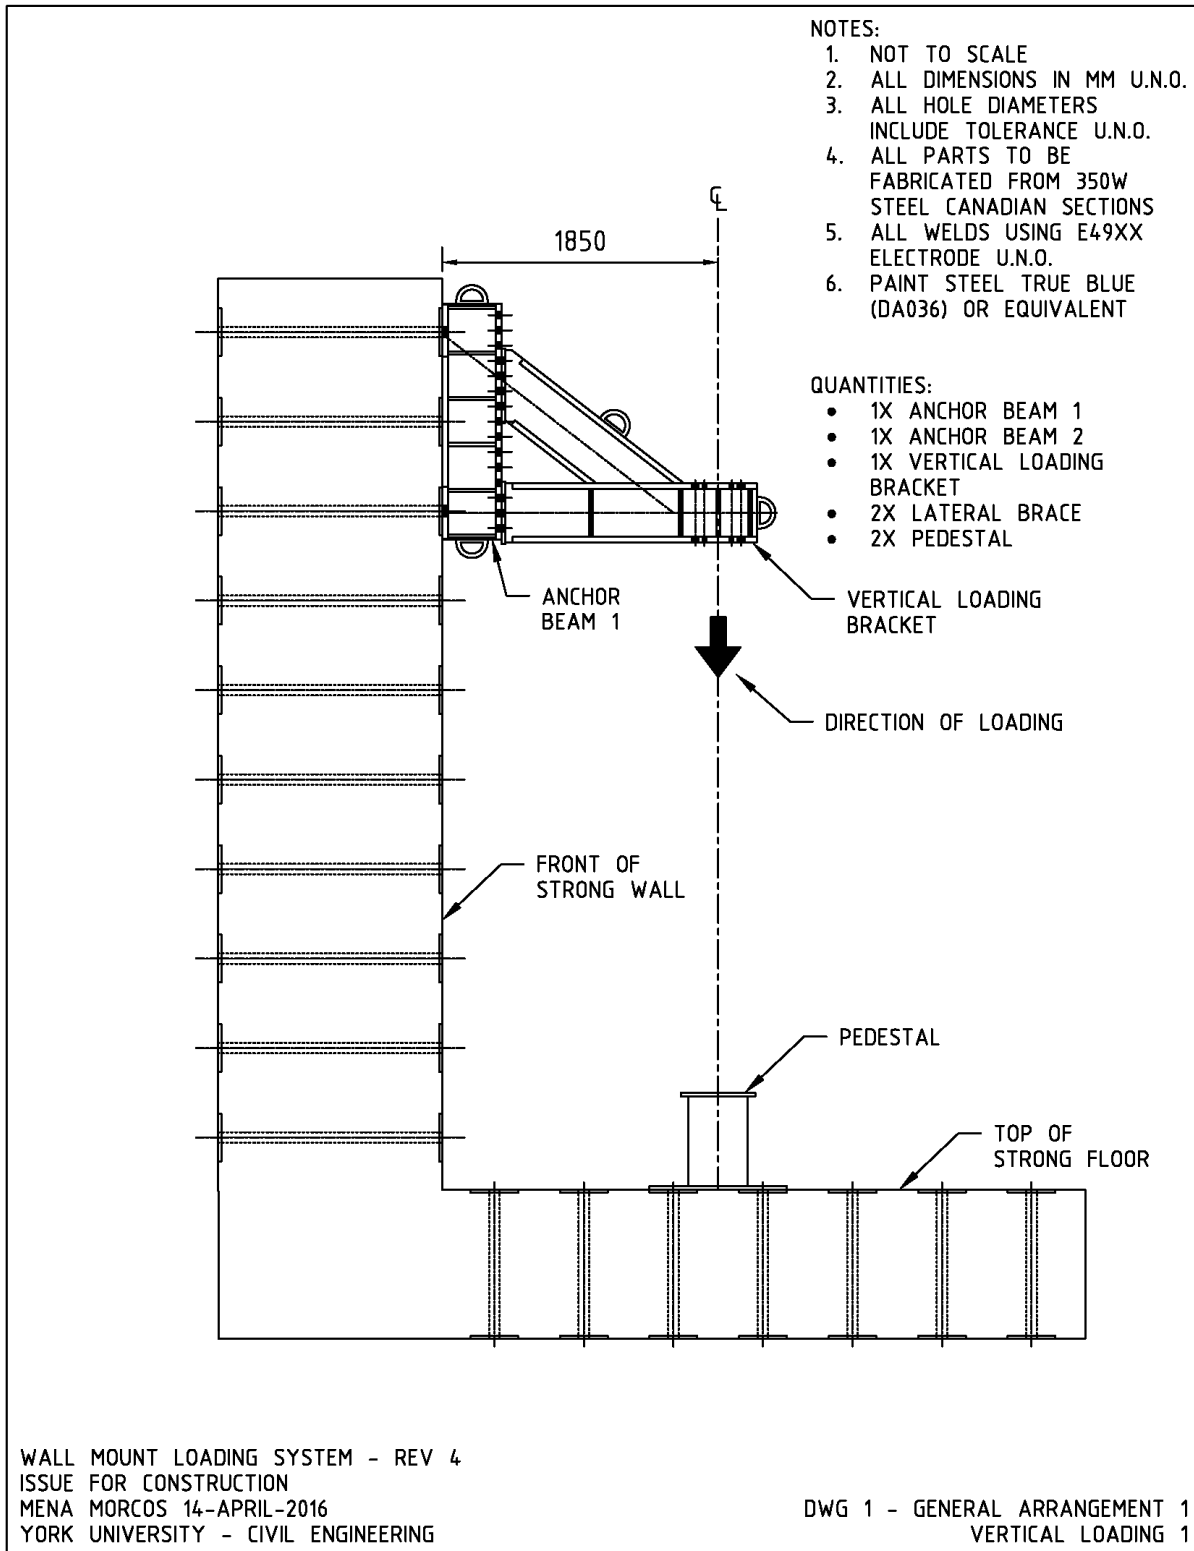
Wall mount loading system design and fabrication drawing – Drawing 1.
